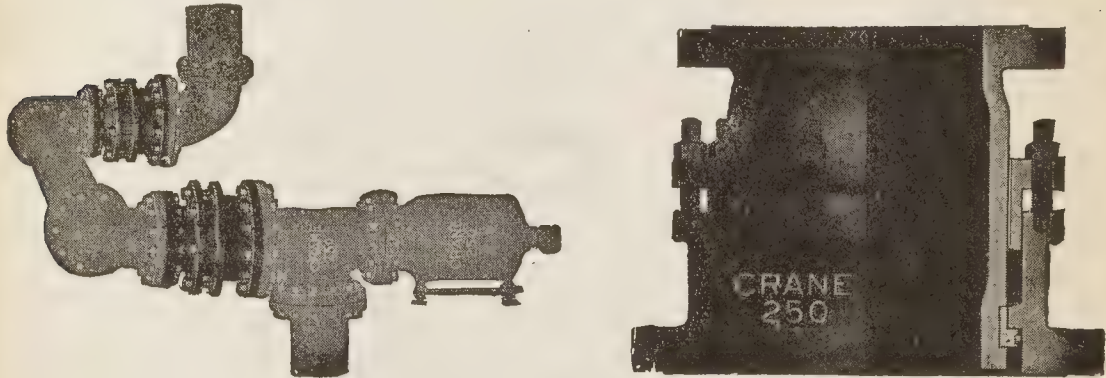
,343 and 8,344.—*Ordinary* expansion joint. It consists of a recessed portion on one part of the joint into which the other fits, the enlarged part forming a stuffing box. The tie rods connecting the two flanges prevent the steam pressure forcing the two ends apart especially if it contain a bend or elbow.
